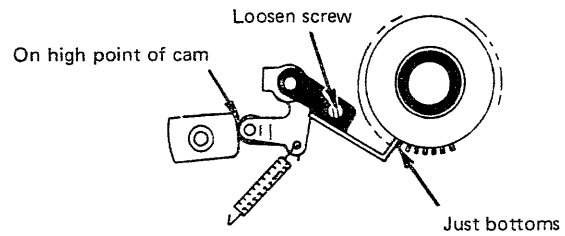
Shift Interlock (Level 1, 15-Inch Machines)
